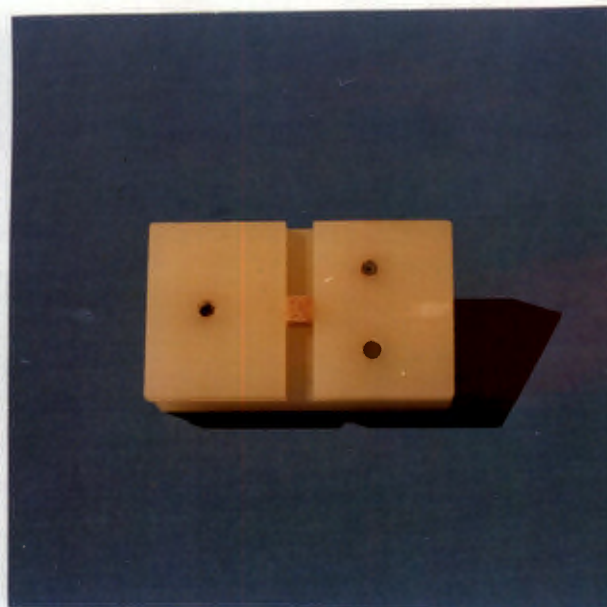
Jig 4, used to hold cube for final finishing-off.
